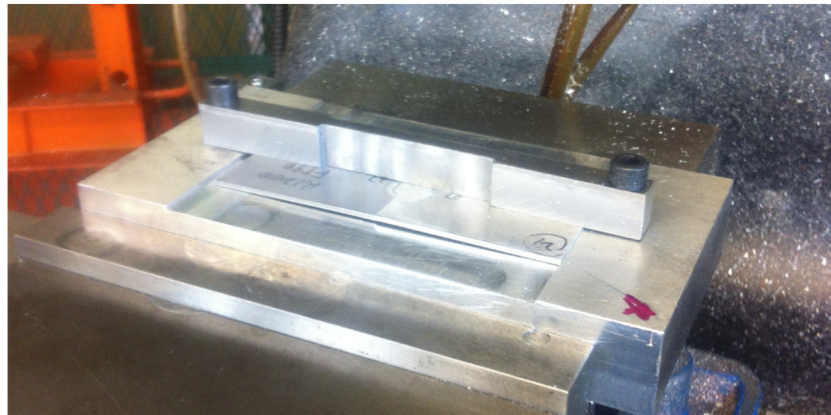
Milling process to obtain tensile specimen from the weld
